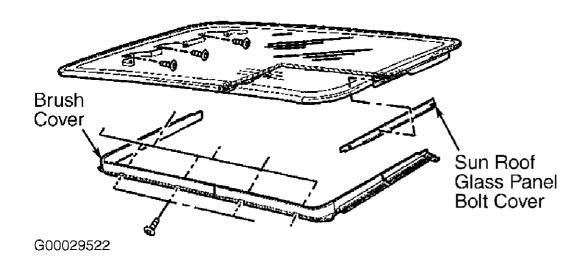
Identifying Sun Roof Glass Panel & Brush Cover Courtesy of GENERAL MOTORS CORP.
